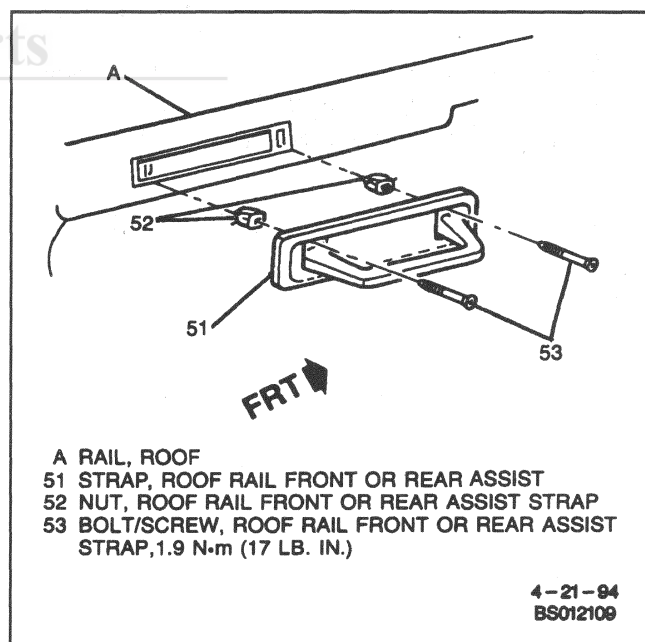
Roof Rail Assist Strap - (Buick Sedan)
